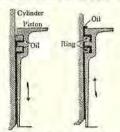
When ring pounding sets in, piston-ring slot clearances enlarge to such an extent that no oil will seal the piston rings. See item 3 under oil pumping on page 168 for explanation of these illustrations; see also page 832.
